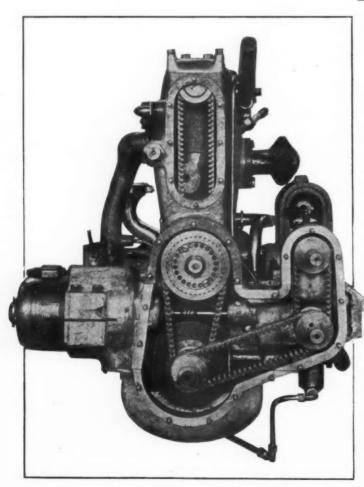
Engine with endcover removed, showing the silent chain system of camshaft and magneto drive, as well as the application of the starting motor
